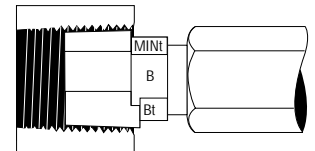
Checking minor diameter truncation with 6 step plain Plug Gages.
